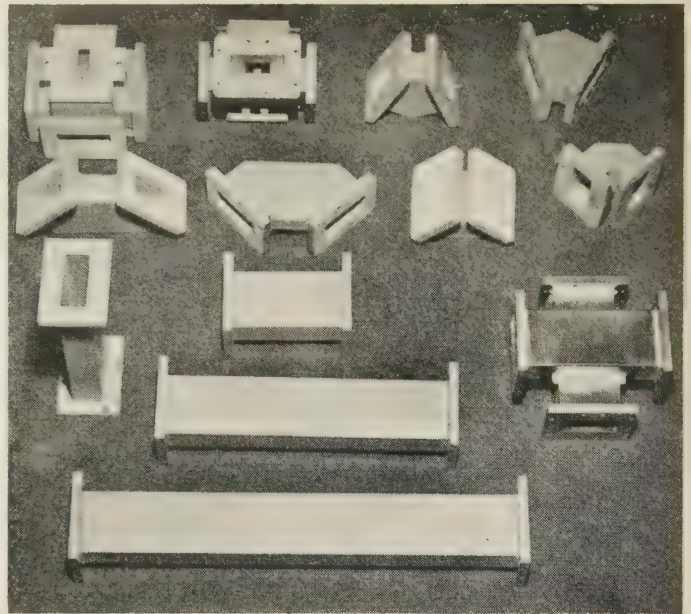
Precision waveguide assembly fabricated by casting (upper) and by brazing and broaching (lower).
